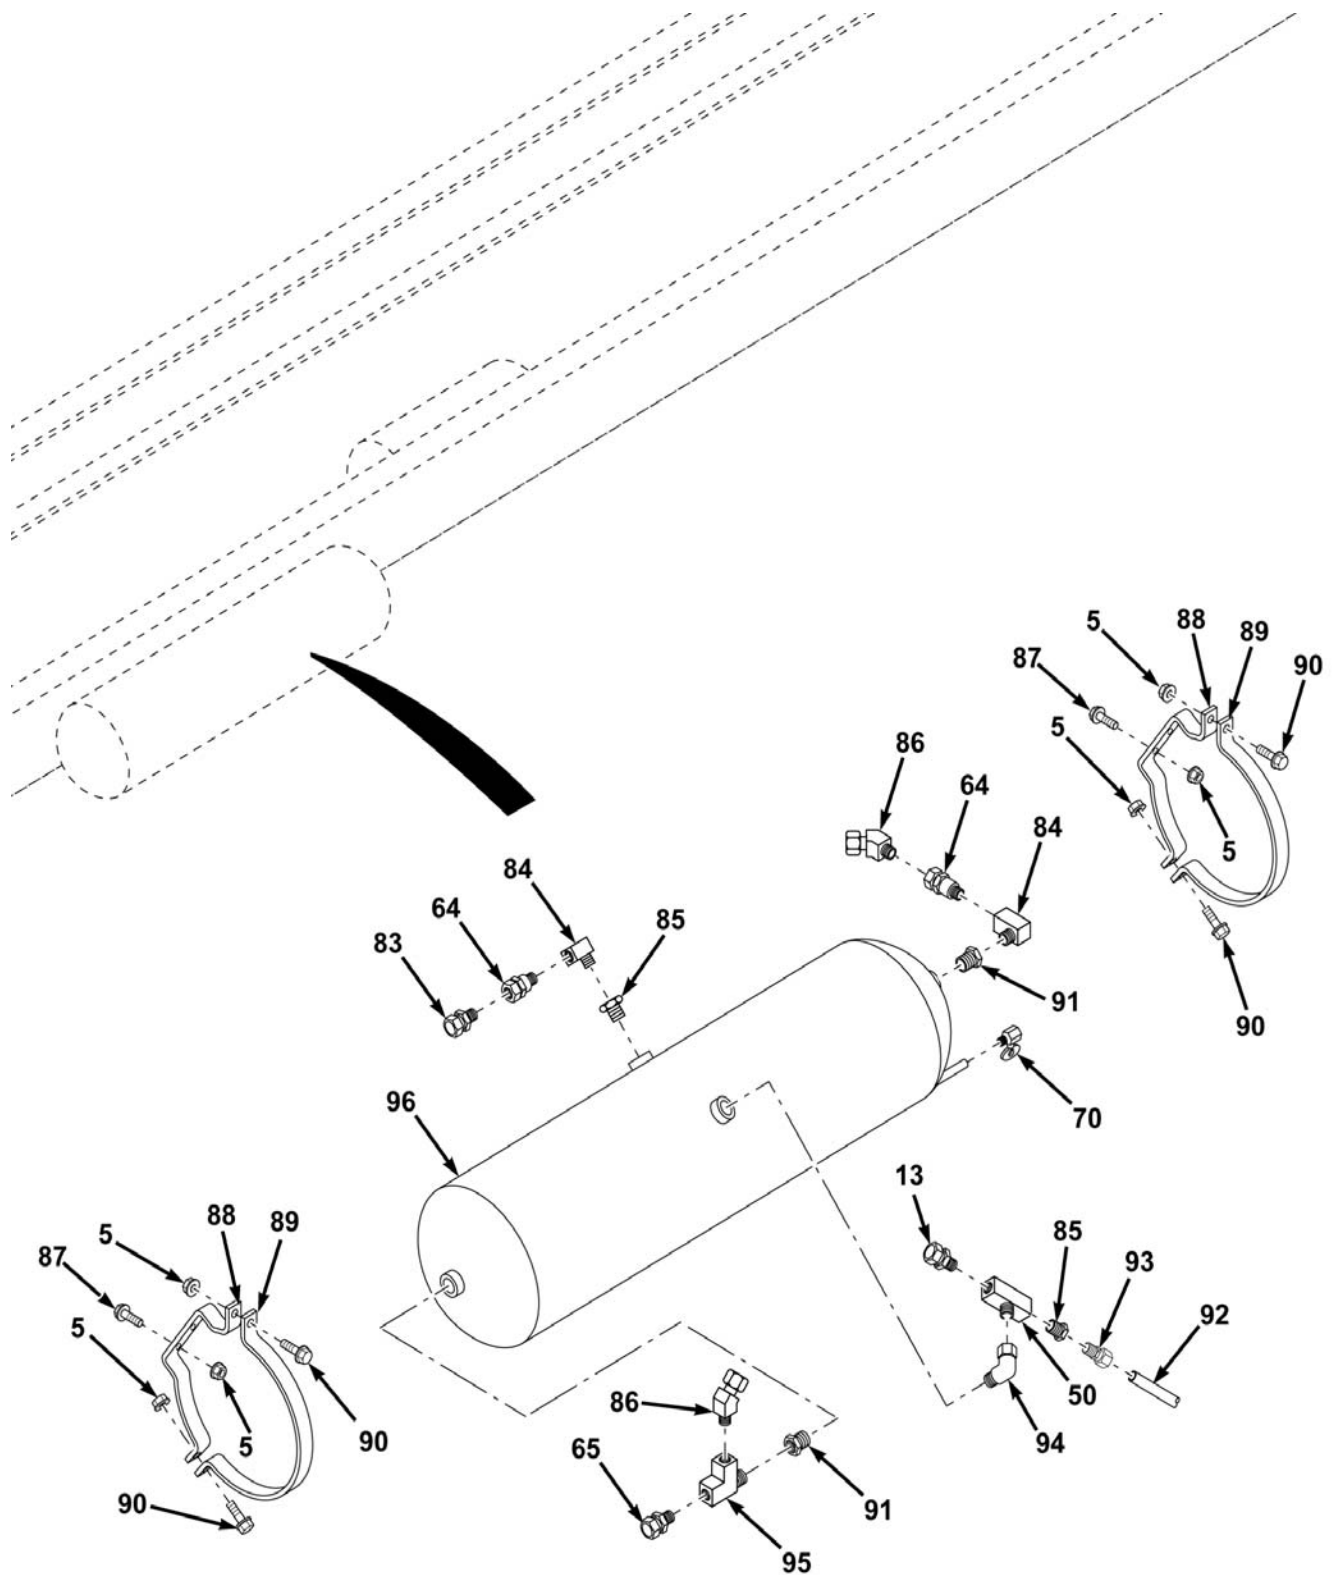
CHASSIS AIR (SHEET 4 OF 15)
